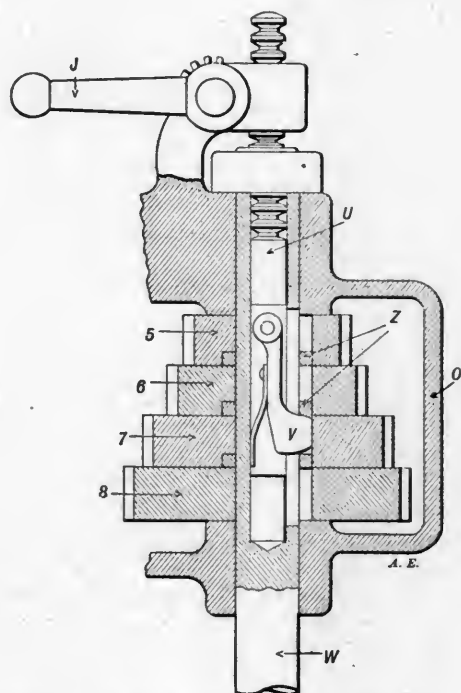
VERTICAL SECTION THROUGH THE FEED GEAR BOX SHOWING "PULL PIN" MECHANISM.
